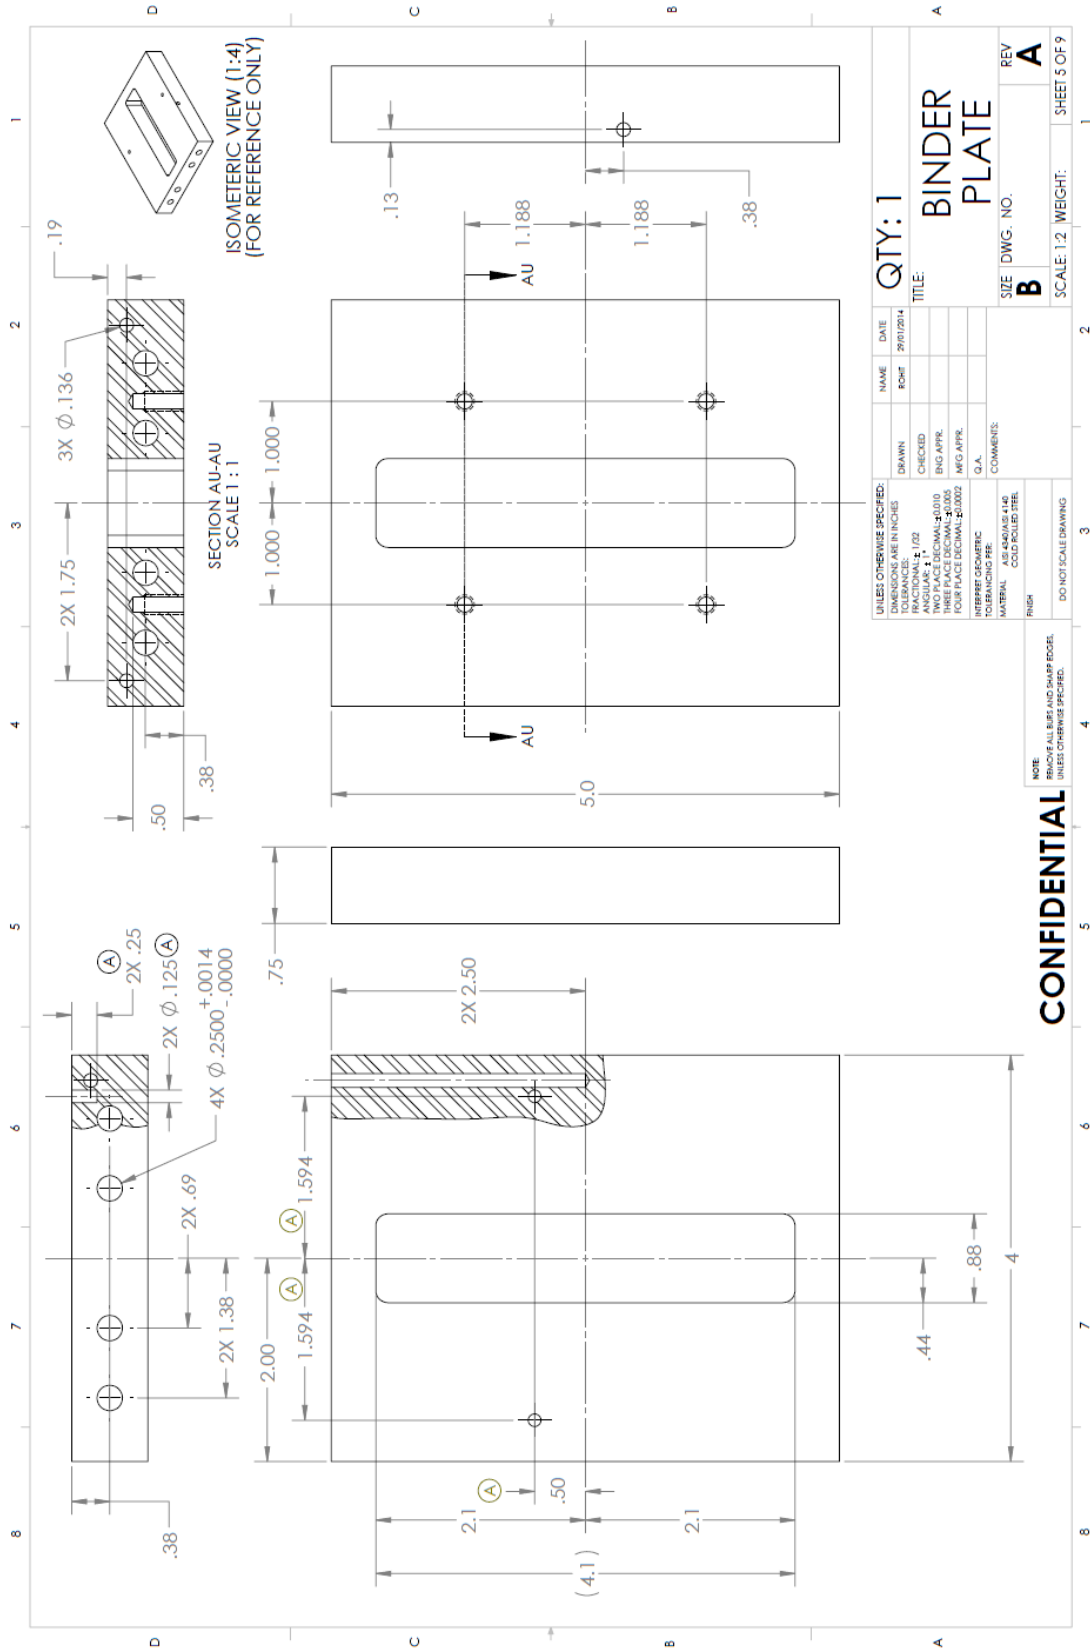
Detailed drawing of the binder plate used in the comprehensive springback study.
